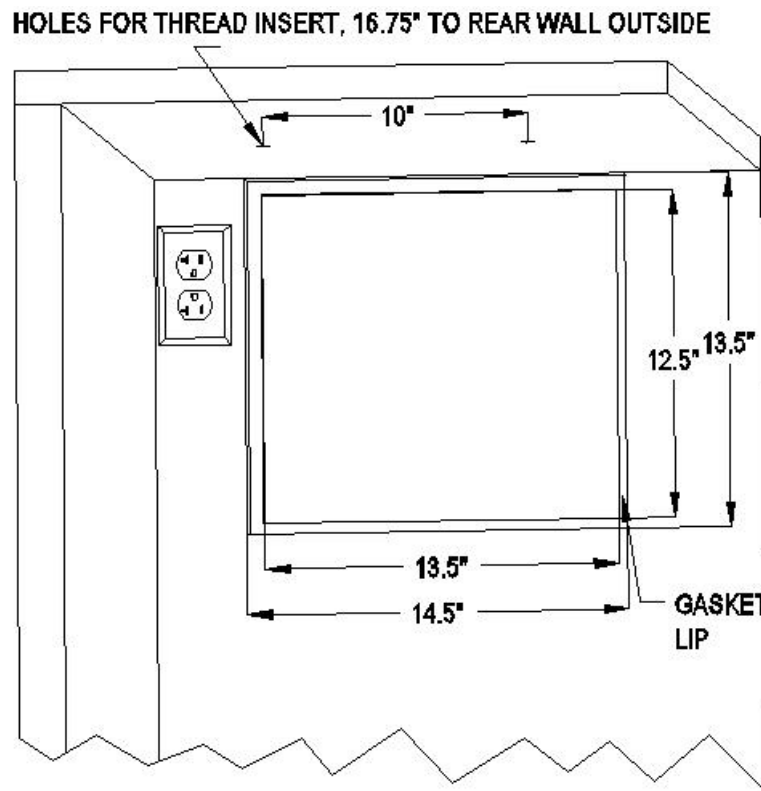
CABINET CUTOUT & GASKET LIP
